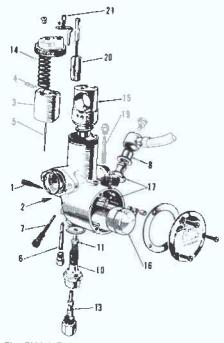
Exploded view of typical Amal Monobloc carburetor used. Refer to Fig. TM4-2 for view of Amal Concentric lloat carburetor.
